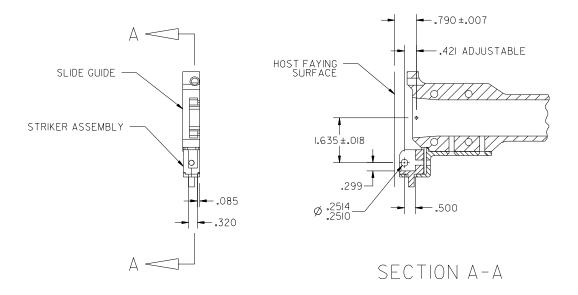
HRF Striker Assembly Geometry
